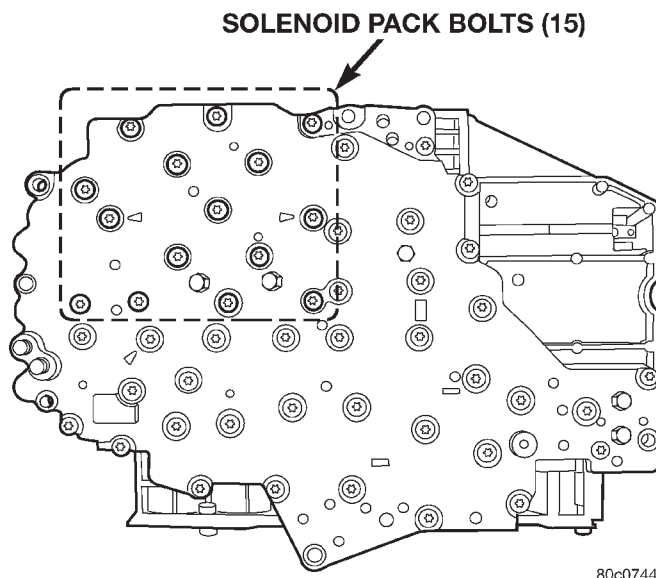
Solenoid and Pressure Switch Assembly Screws
